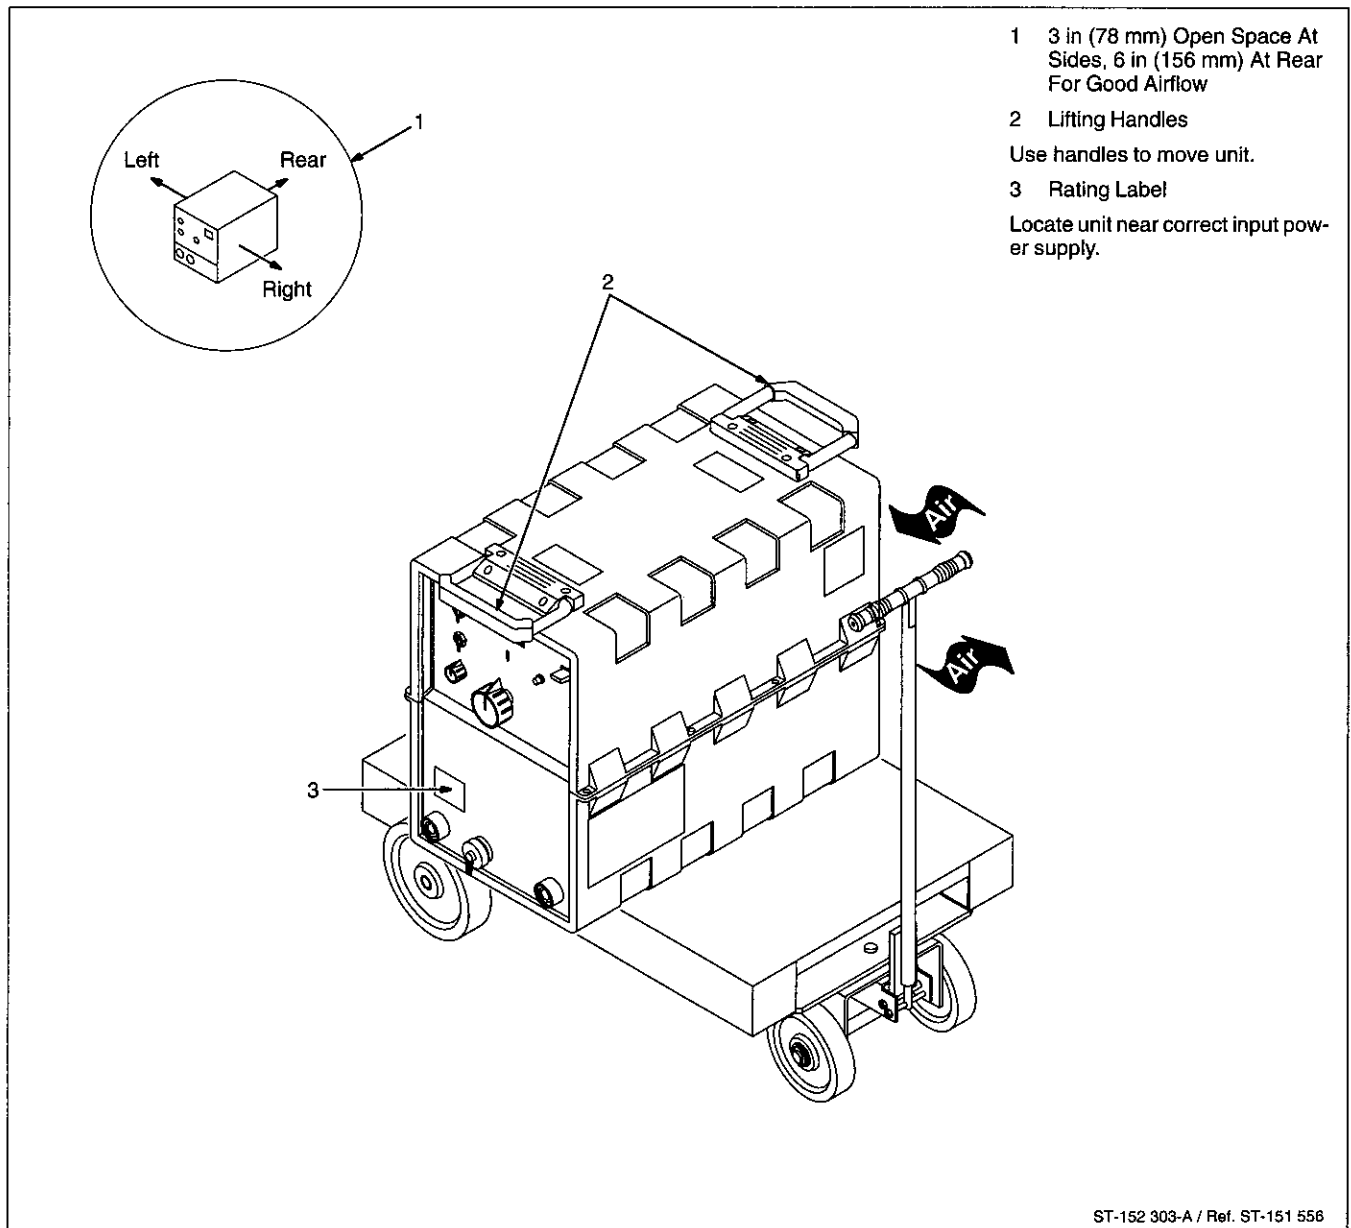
Location And Movement Of Welding Power Source
